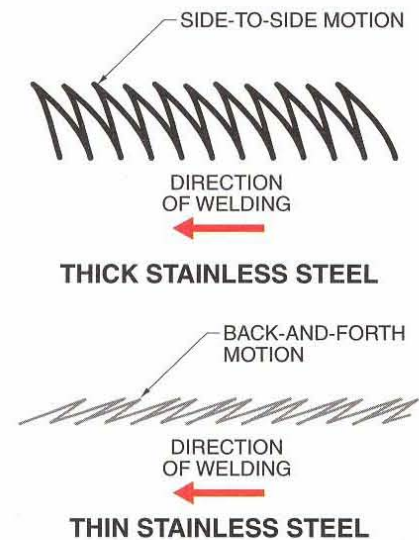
When using GMAW to weld stainless steel plates, a slight weaving motion is used.
